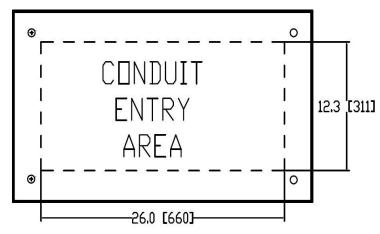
Top Dimensions, Customer I/O Panel (Enclosed)
